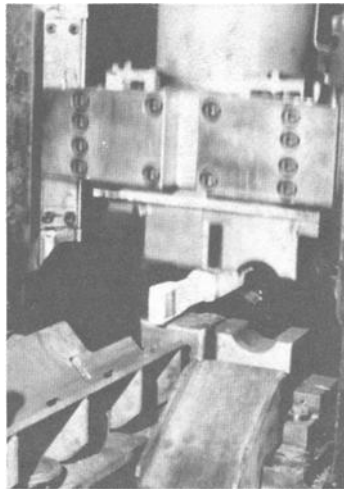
Automatic preform forging press in operation.* (Courtesy of Schirmer-Plate-Siempelkamp Hydraulic Presses.)
